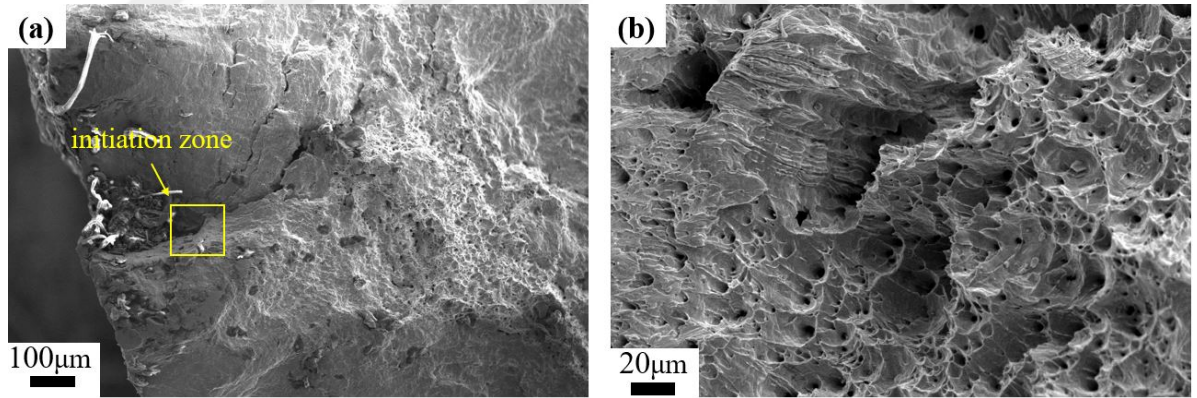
The fatigue fracture surface of condition R 316L sample broken in 1.400.365 cycles, at 75% of σ_{yield} MPa (a) crack initiation zone, (b) Final rupture zone.
